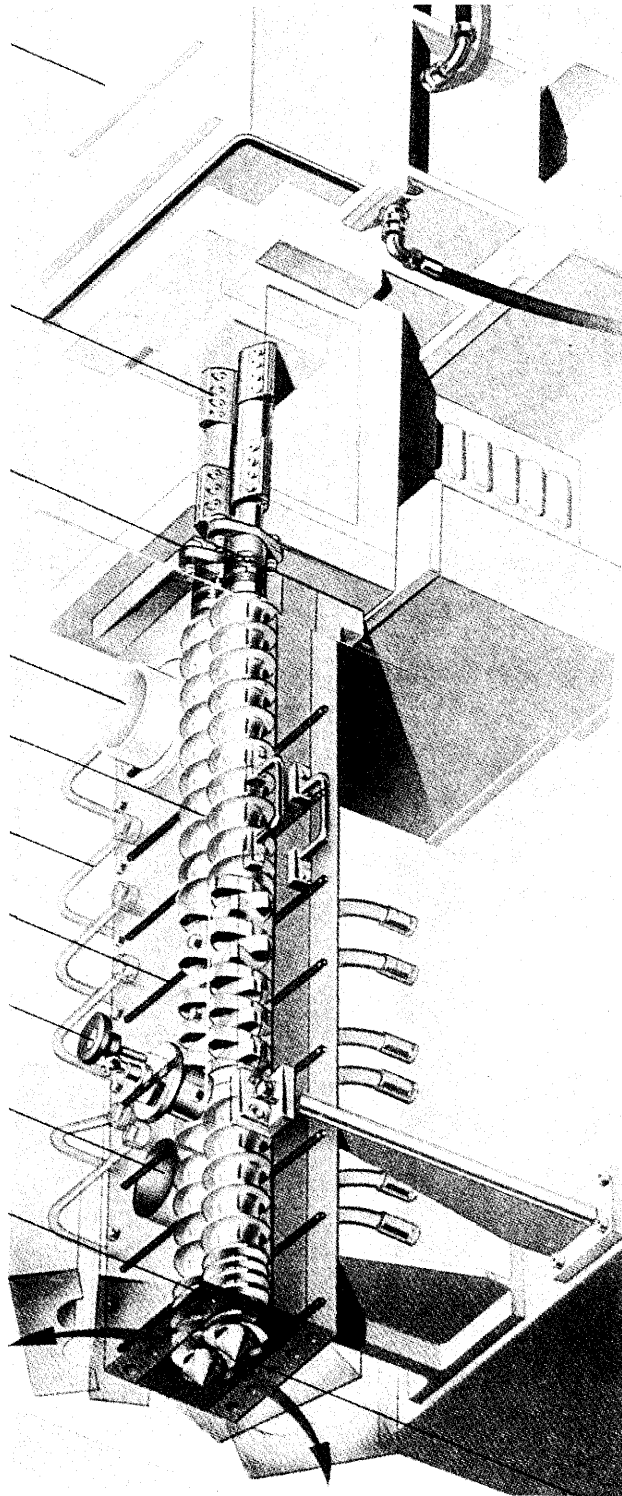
Co-rotating twin-screw extruder. (Courtesy of Baker-Perkins.)
